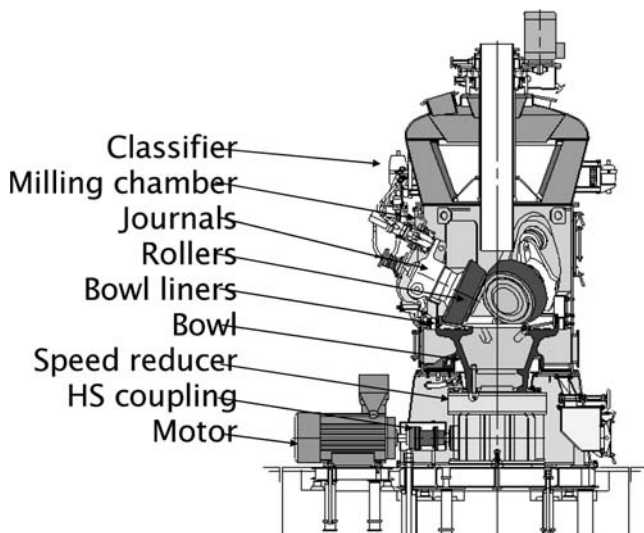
Mill for coal pulverizing (Courtesy of Alstom)
